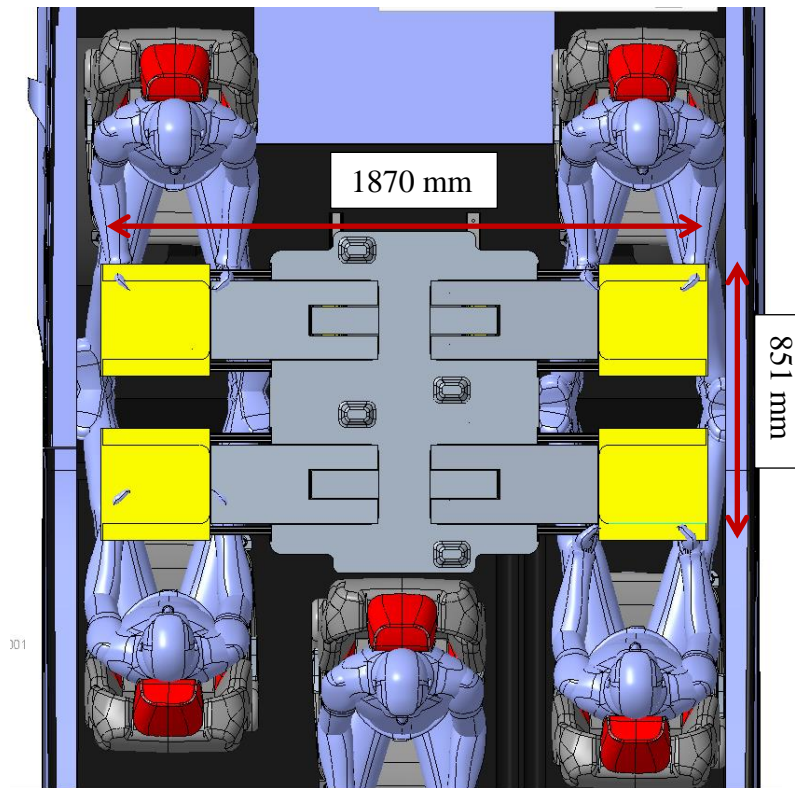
3D CAD model Console with deployed worksurface for user's access
